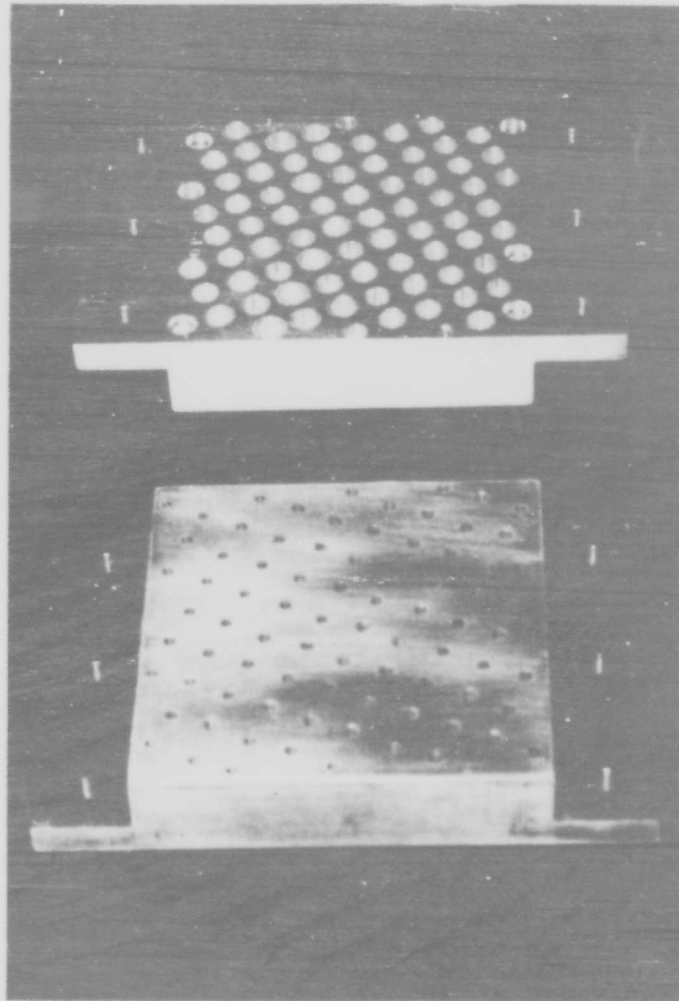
Test Plates With 80-0.125 In. Diameter Holes
